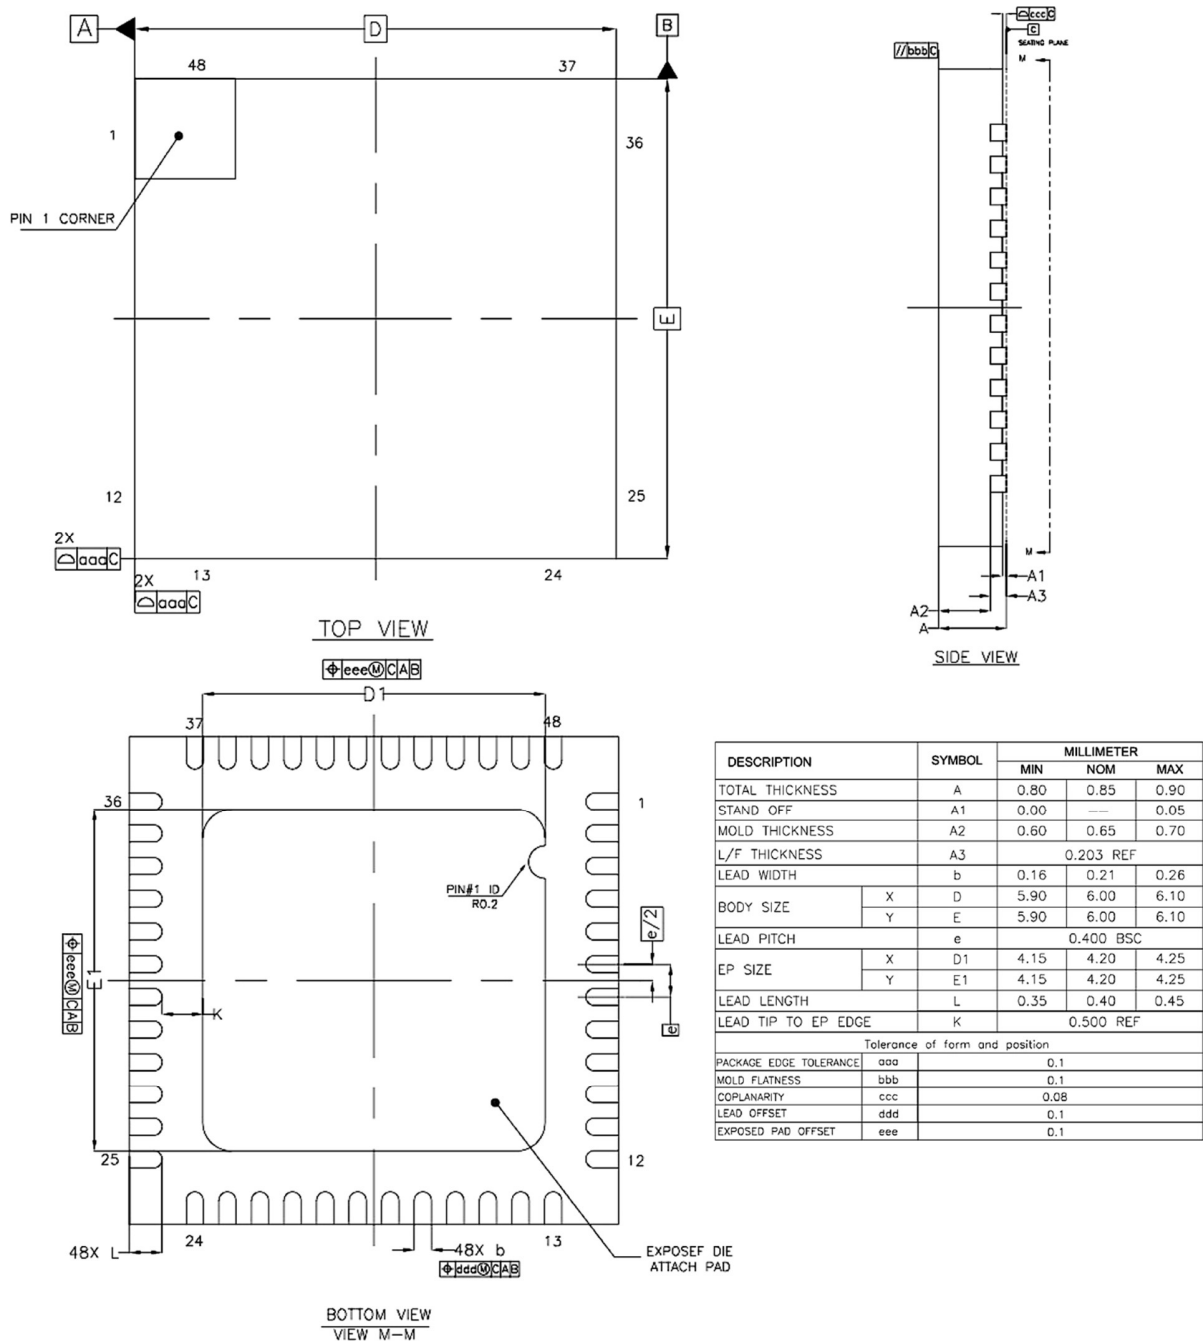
IN610 IN610L IN612L QFN48 6mmx6mm package outline drawing
